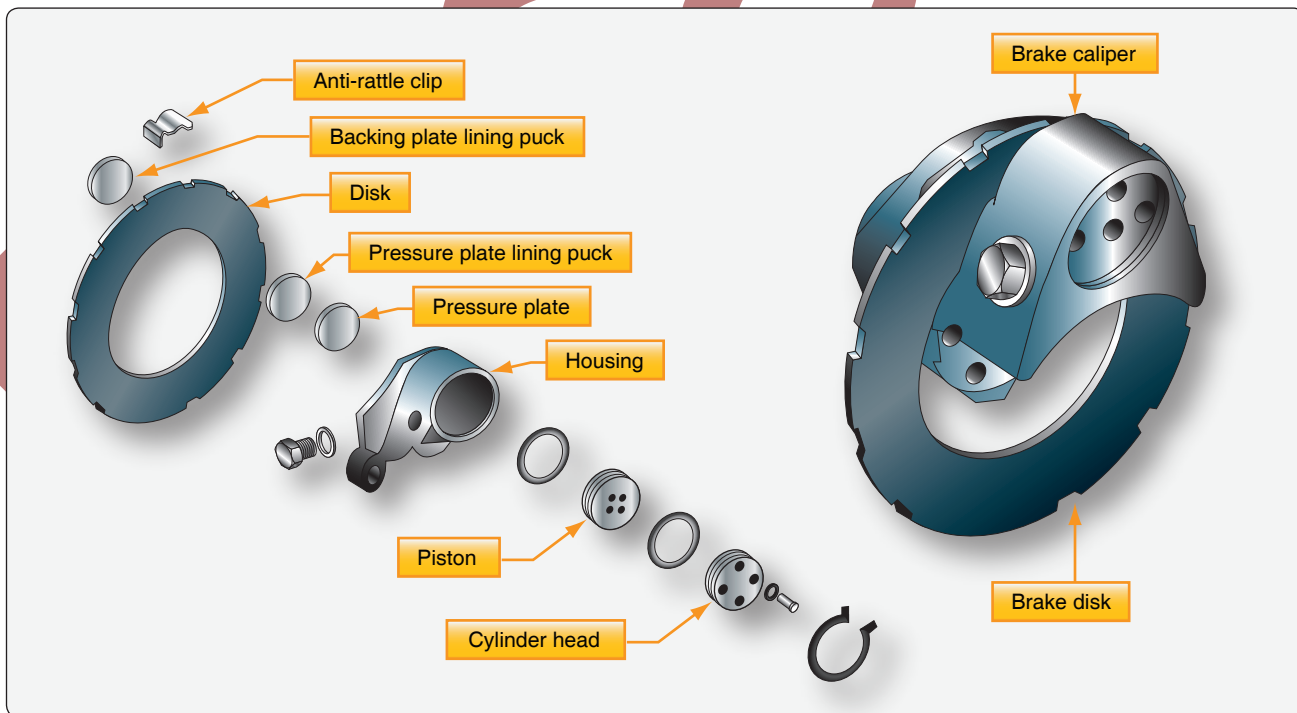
Goodyear brake lining replacement requires that the wheel be removed from the axle to access the brake assembly. The lining pucks slip into recesses in the brake housing.
